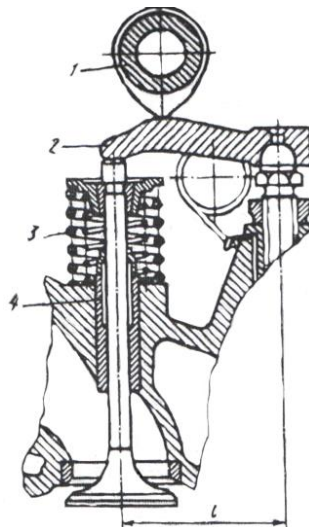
Cam mechanism; 1 - cam; 2 - pusher (lever); 3 - valve springs; 4 – bushing
